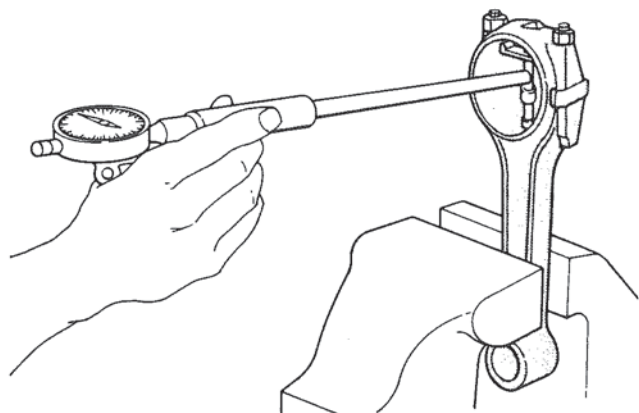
Measuring Inner Diameter of Connecting Rod Bearing.
